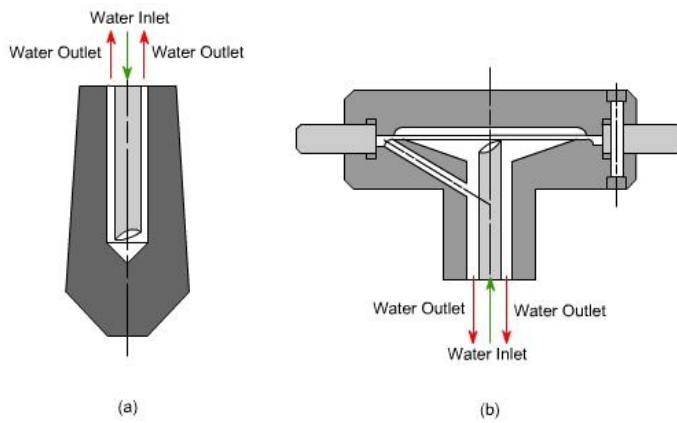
FIGURE Water Cooling of Electrodes (a) Spot Welding (b) Seam Welding
